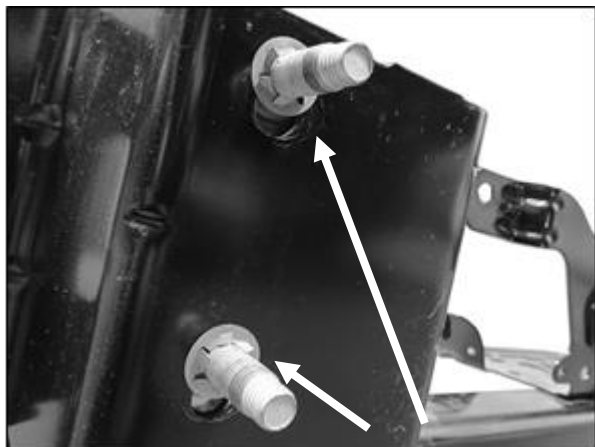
Install lights, sensors, trailer plug and harness before installing Bumper
